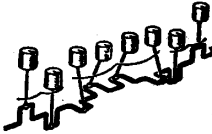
Eight throw crankshaft with the 2-4-2 design.
